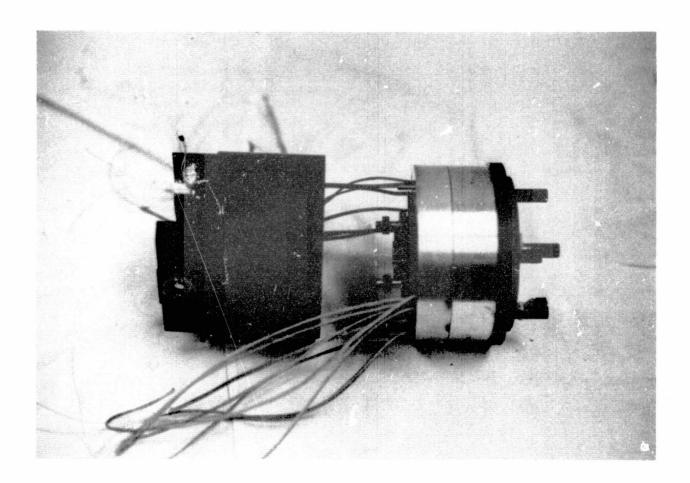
illustrates the positioning of the components from the previous two illustrations prior to their final assembly. The precision of the manufactured components now shows to be quite critical yet the tolerances provided for on the working drawings proved to be quite accurate and needed no additional machining.
